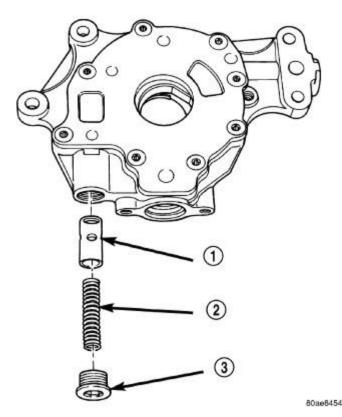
Oil Pressure Relief Valve Courtesy of CHRYSLER LLC
